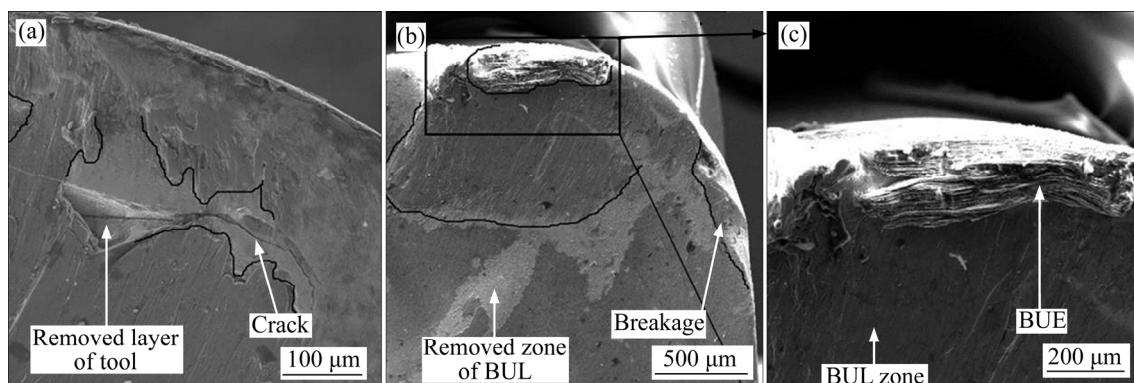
SEM images of tool rake face for MQL based conventional cutting fluid: (a) Breakage on tool rake face; (b) BUL, BUE and edge breakage; (c) Enlarged image
